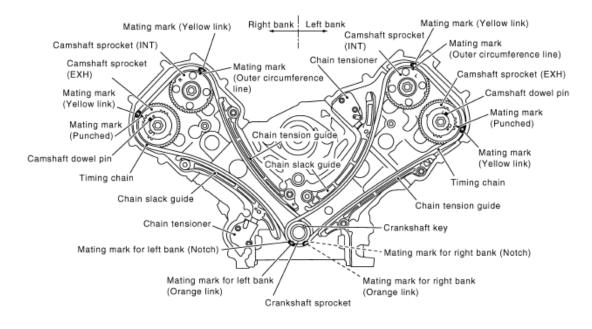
Identifying Crankshaft Sprockets For Banks Courtesy of NISSAN MOTOR CO., U.S.A.
